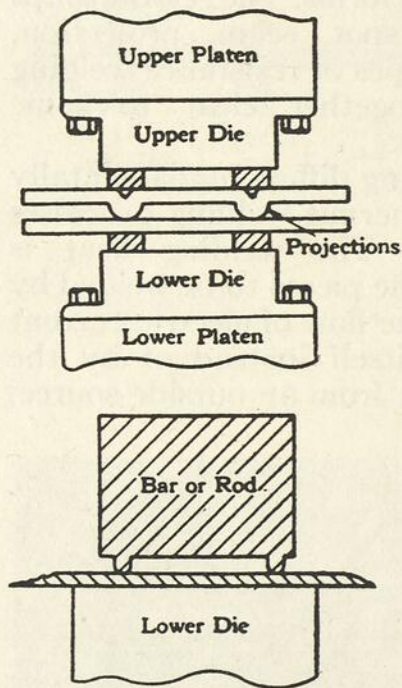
Projection welding dies for use on press-type welders. These are used where it is desired to make several spot welds simultaneously. Special kinds of spot welds involving greater pressure or other factors governed by the nature of the work are also made with similar projections.
